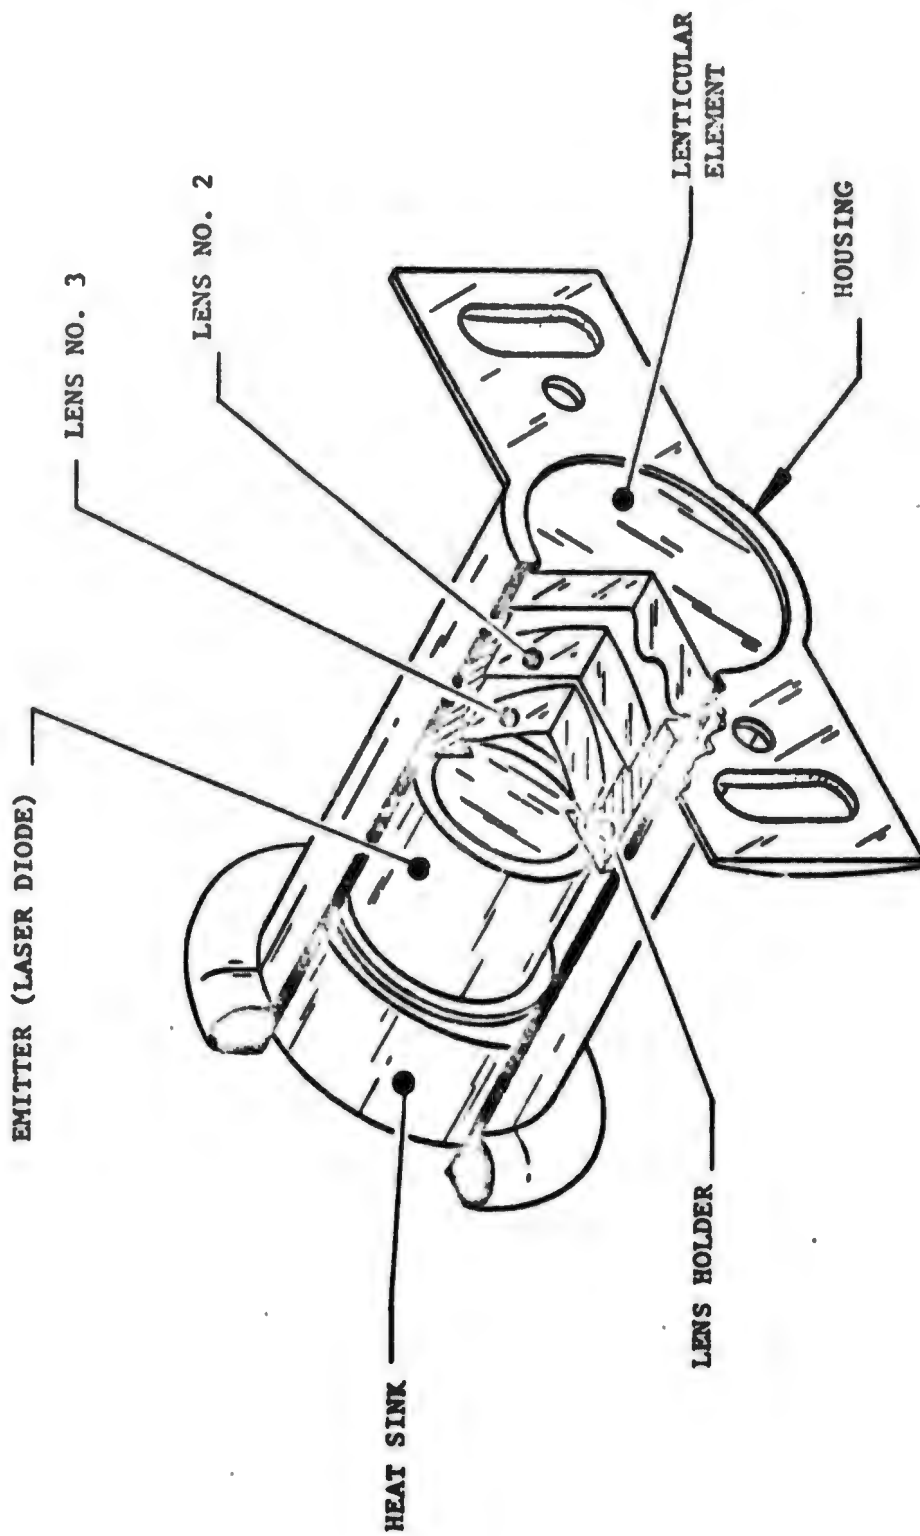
TRANSMITTER OPTICS ASSEMBLY
